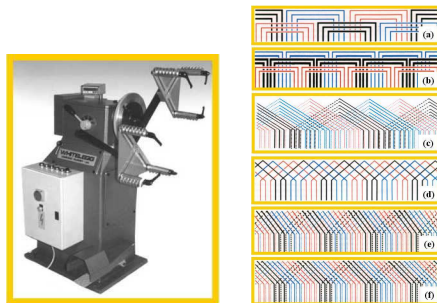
(left) Semi-automatic coil winding machine; (right) Typical winding configurations: (a) two-tier, concentric winding; (b) three-tier, concentric winding; (c) double-layer, short-pitched, concentric winding (d) single-layer, lap winding (e) double-layer, short-pitched, lap winding; (f) double-layer, full-pitch, lap winding.
